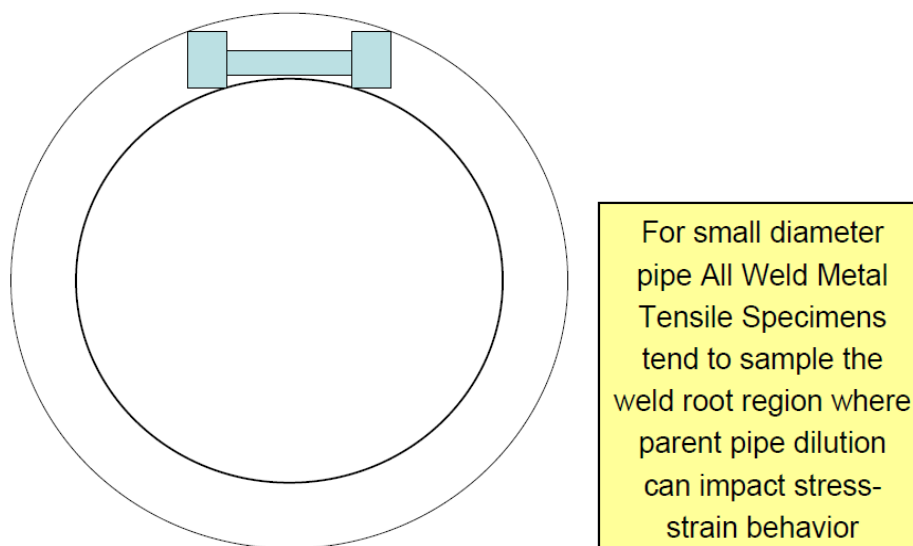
All Weld Metal Tensile Sample Location in Small Diameter Pipe
